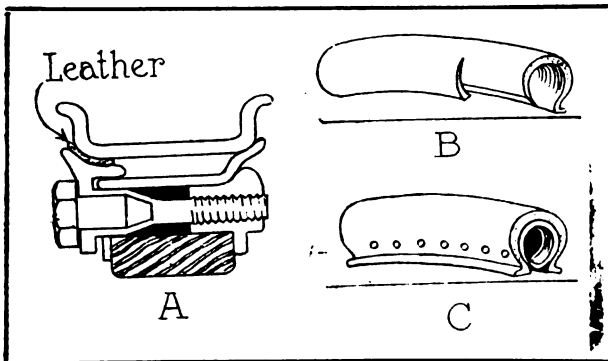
A, Silencing Noisy Tire Rim with Leather Strips; B, Tire Section Trimmed for Fitting to Shoe; C, Section Cemented and Riveted in Place.
